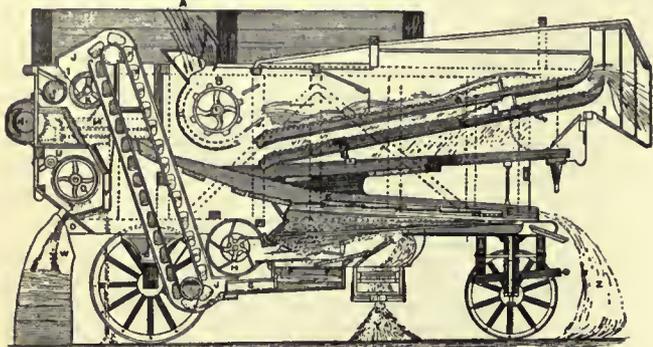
The internal construction and arrangement of the "Ruston" double crank finishing Thrashing Machine. (Ruston, Procter & Co., Lincoln.)
